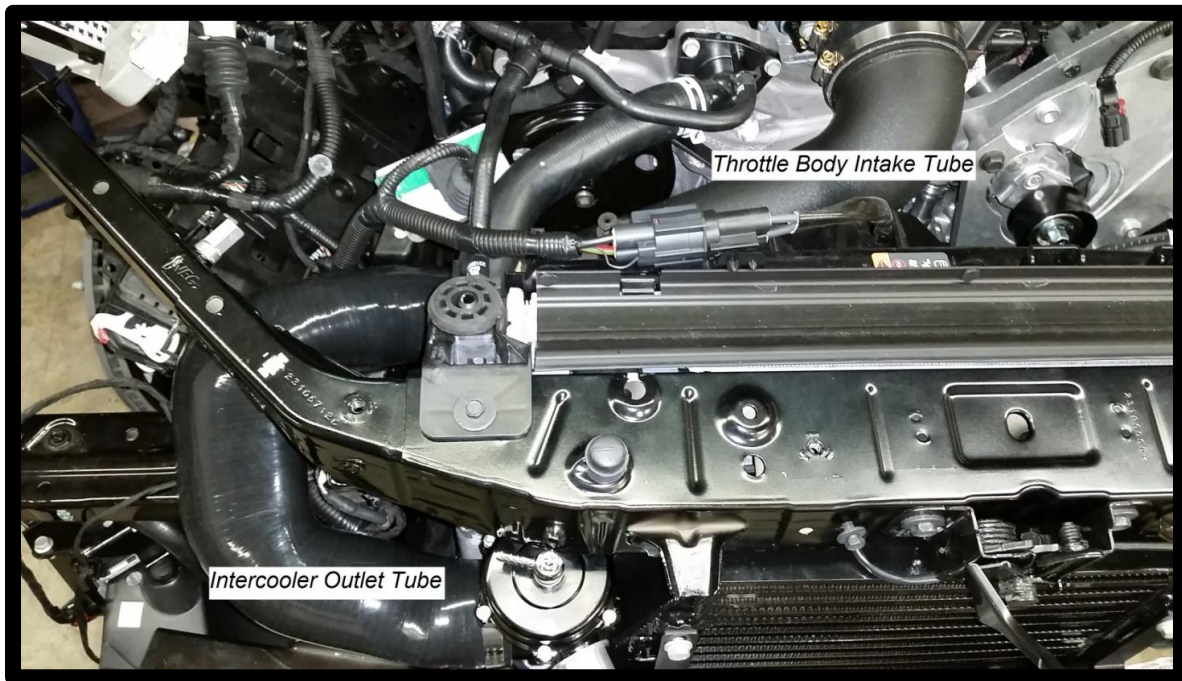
Intercooler Outlet Tube and Throttle Body Intake Tube
